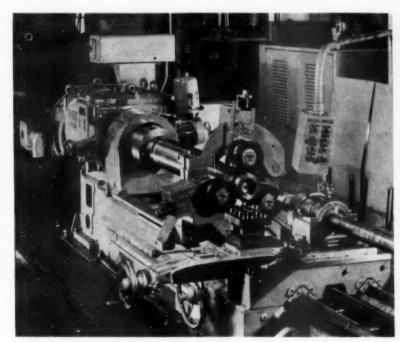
Trepan lathe with the workpiece completely bored out and ready to be unloaded. A support bushing
